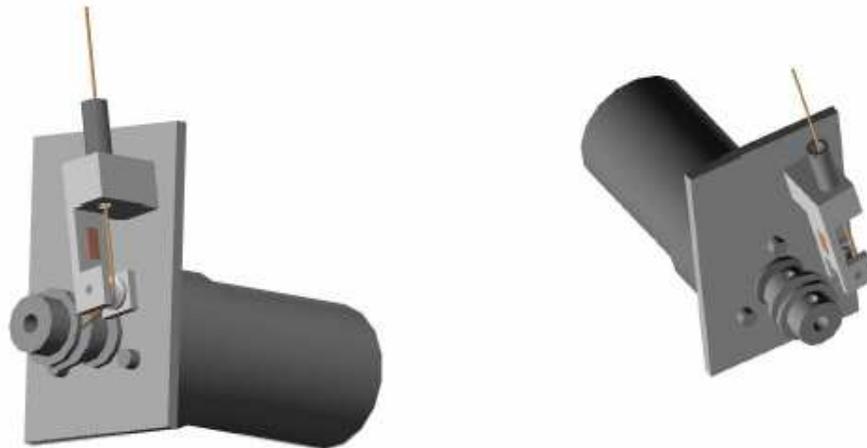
Cable Tension Measurement using a strain gauge load element
